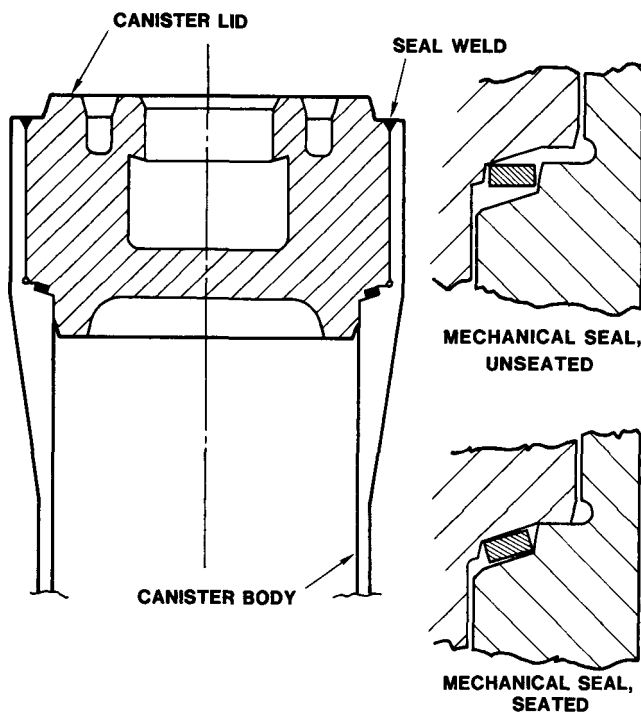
Reusable Seal-Welded LMFBR Spent Fuel Canister With Inner Seal
